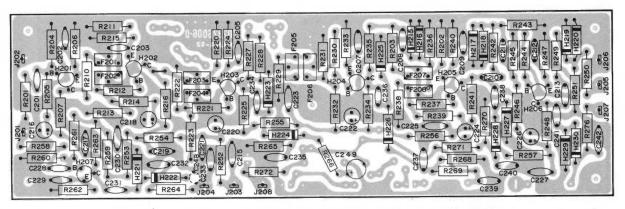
FM IF Amplifier Assembly P200 Component Locations
